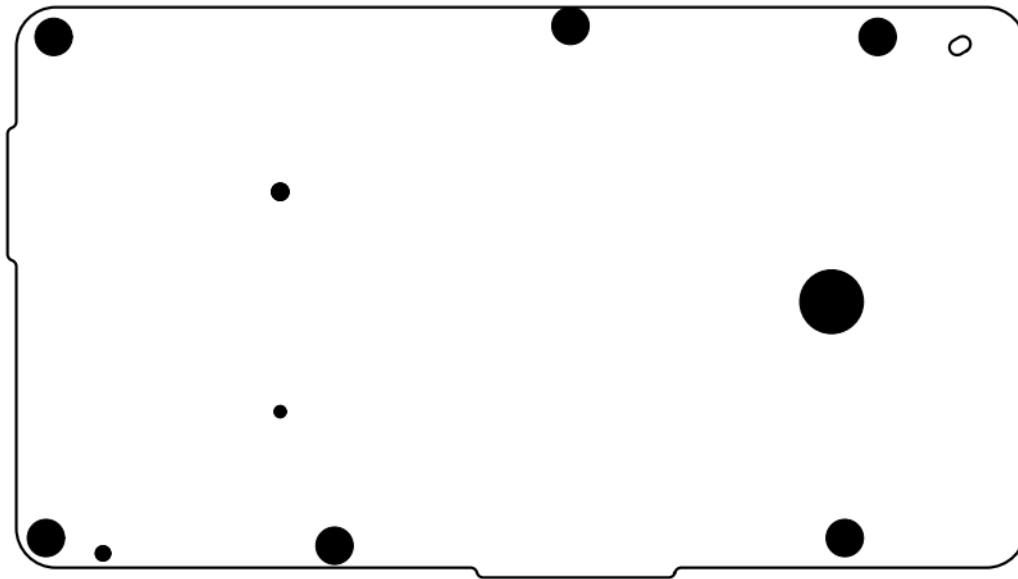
5G S-Module All-in-one Type-M Pin Layout BOT view
